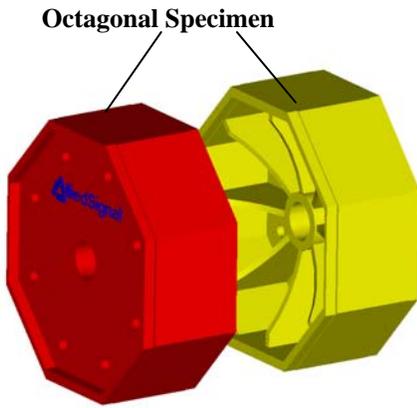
Multi-purpose universal welding & testing system (Consists from welded together two octagonal specimens. Thickness of weld beads may vary from 2.5 to 6 mm).
